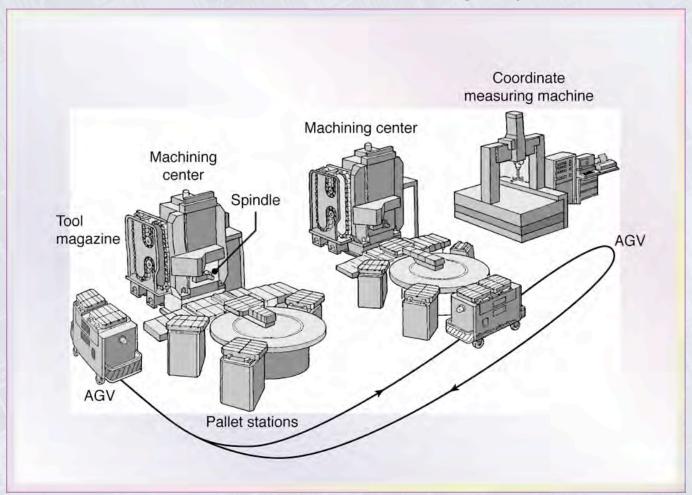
A schematic illustration of a flexible manufacturing system showing machining centers, a measuring and inspection station. And automated guided vehicles. *Source*: After J. T. Black.
